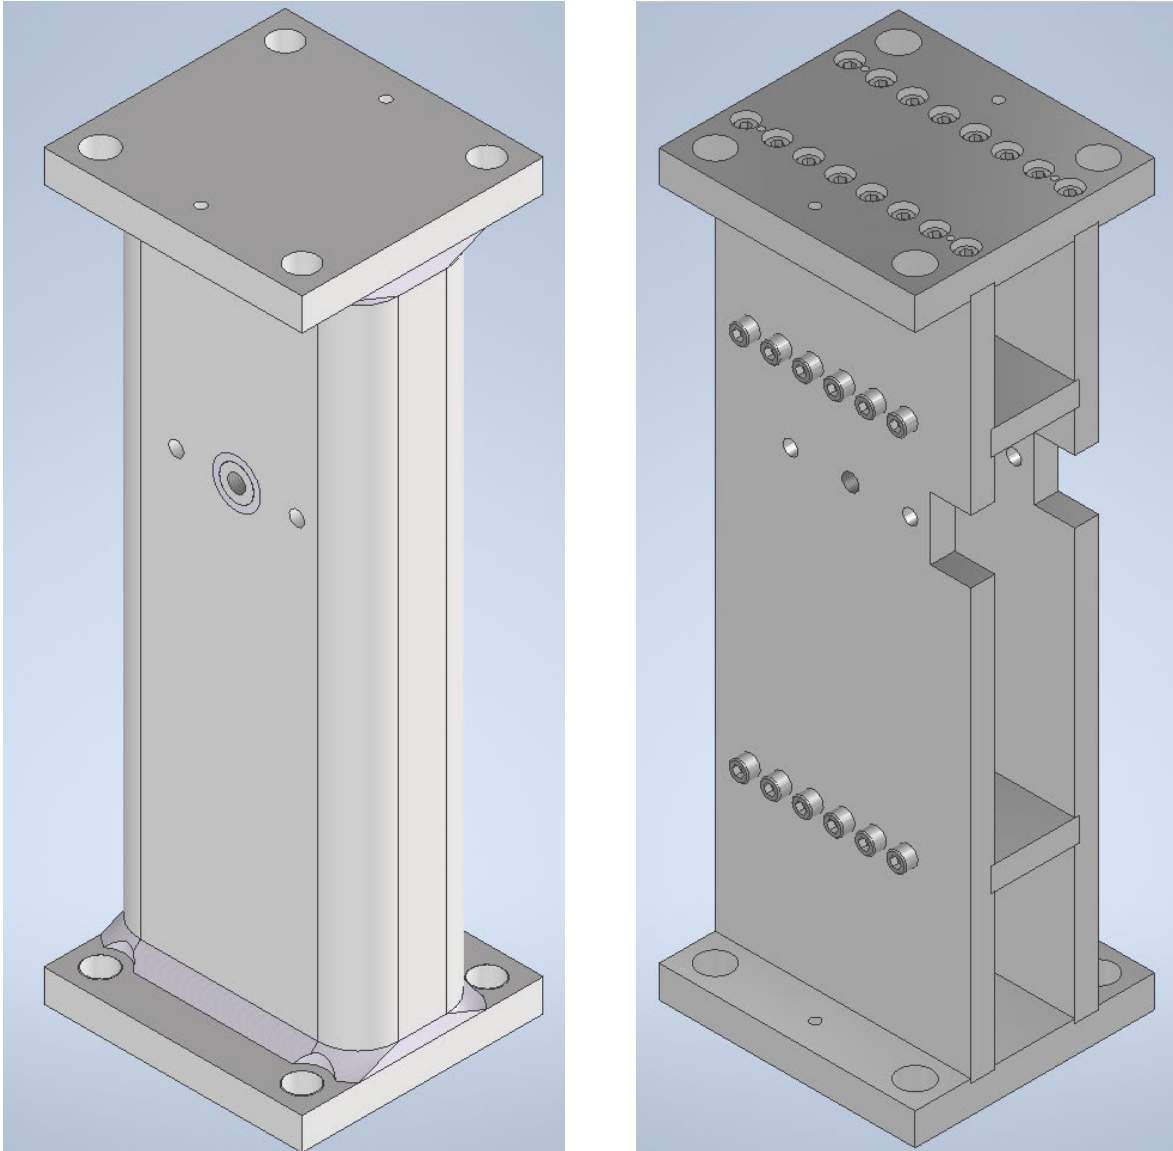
Welded support column (left) and new fastened support column (right).
